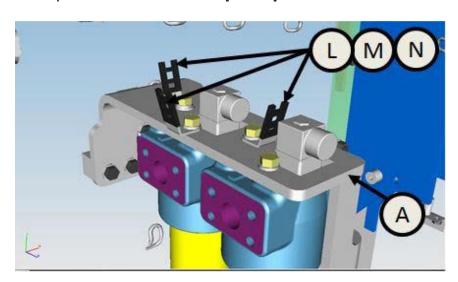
Hydraulic screen mounting bolt locations. NB: ladder clips (locations L, M, N) require longer 4L6454 bolts.
